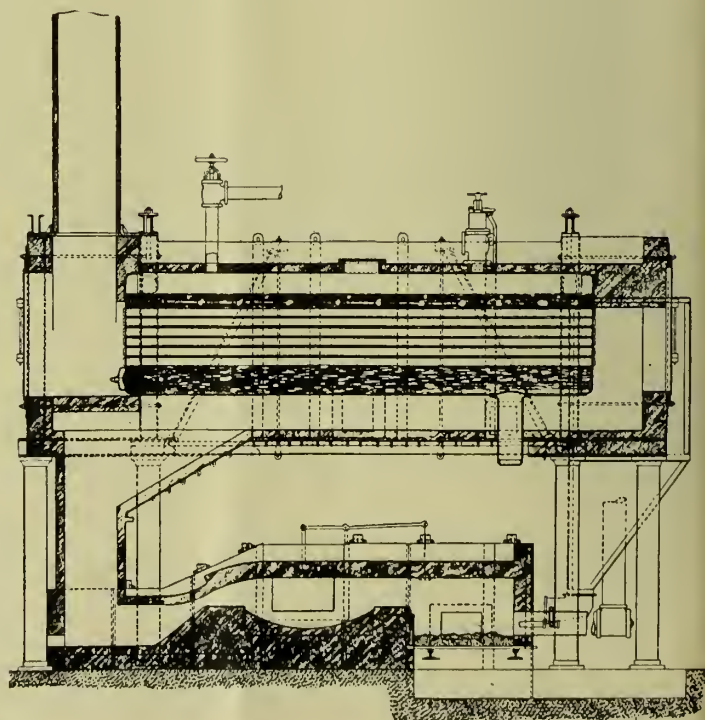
shows a sectional elevation through a puddling furnace arranged with a return tube waste-heat boiler and equipped for burning powdered coal.
